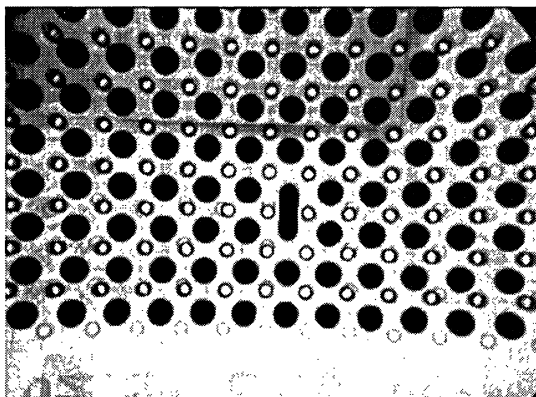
X-ray Micrograph of a Mounted PBGA Showing Solder Shorting
